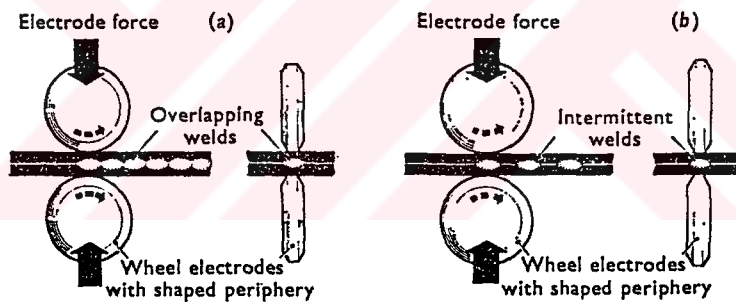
Seam-Welding Principle. (a)Overlapping spots; (b)Roller spot.
